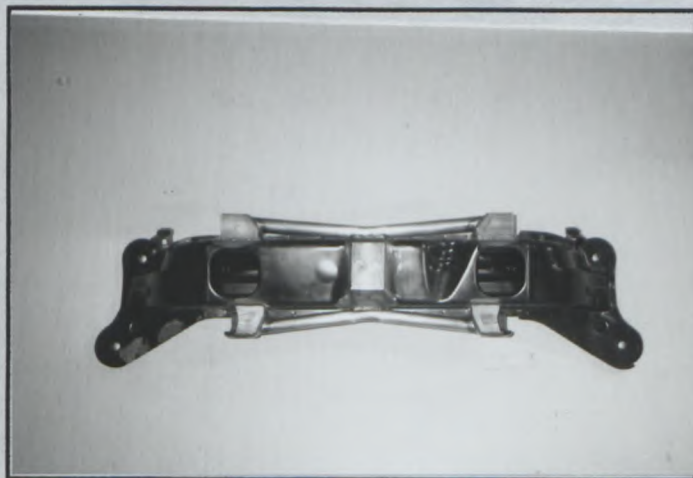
REINFORCED FRONT TOP MOUNT A
